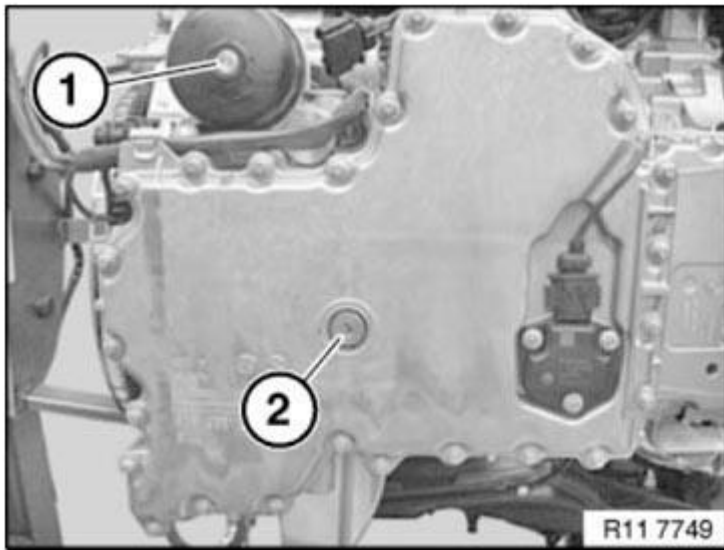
Identifying Screw Plug Of Oil Filter Cap And Oil Sump
